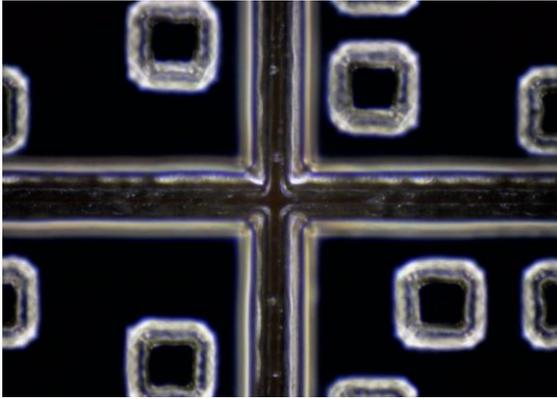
SoP-TM wafer after highspeed laser dicing
